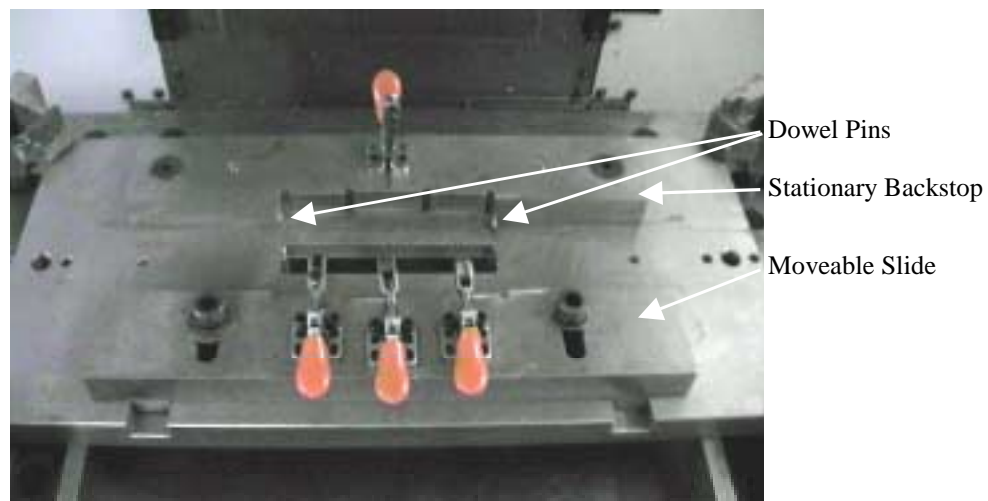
Multi-bolt joint assembly jig used in the instrumented bolt tests to simultaneously centre the bolts in the holes, align them with the loading direction, and torque them to the required level
